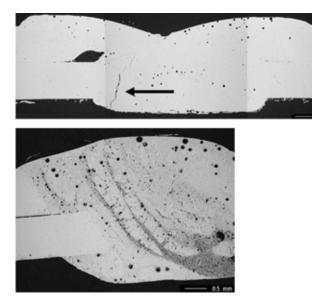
Macrosection showing solidification cracking within the weld on 5754 base material (top). Use of 4047 filler addition slightly increased microporosity but substantially reduced solidification cracking.
